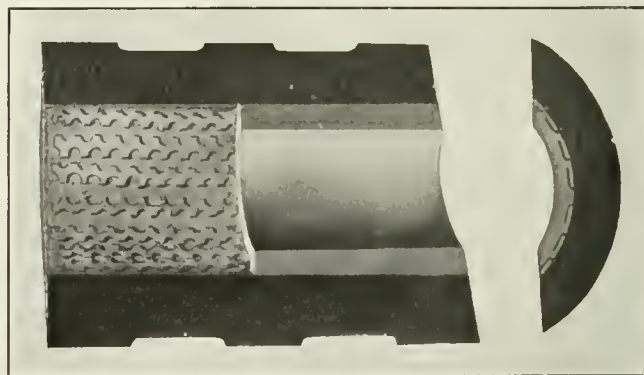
Bearing babbitted by the Bollinckx Method, with Part cut away to show Construction
